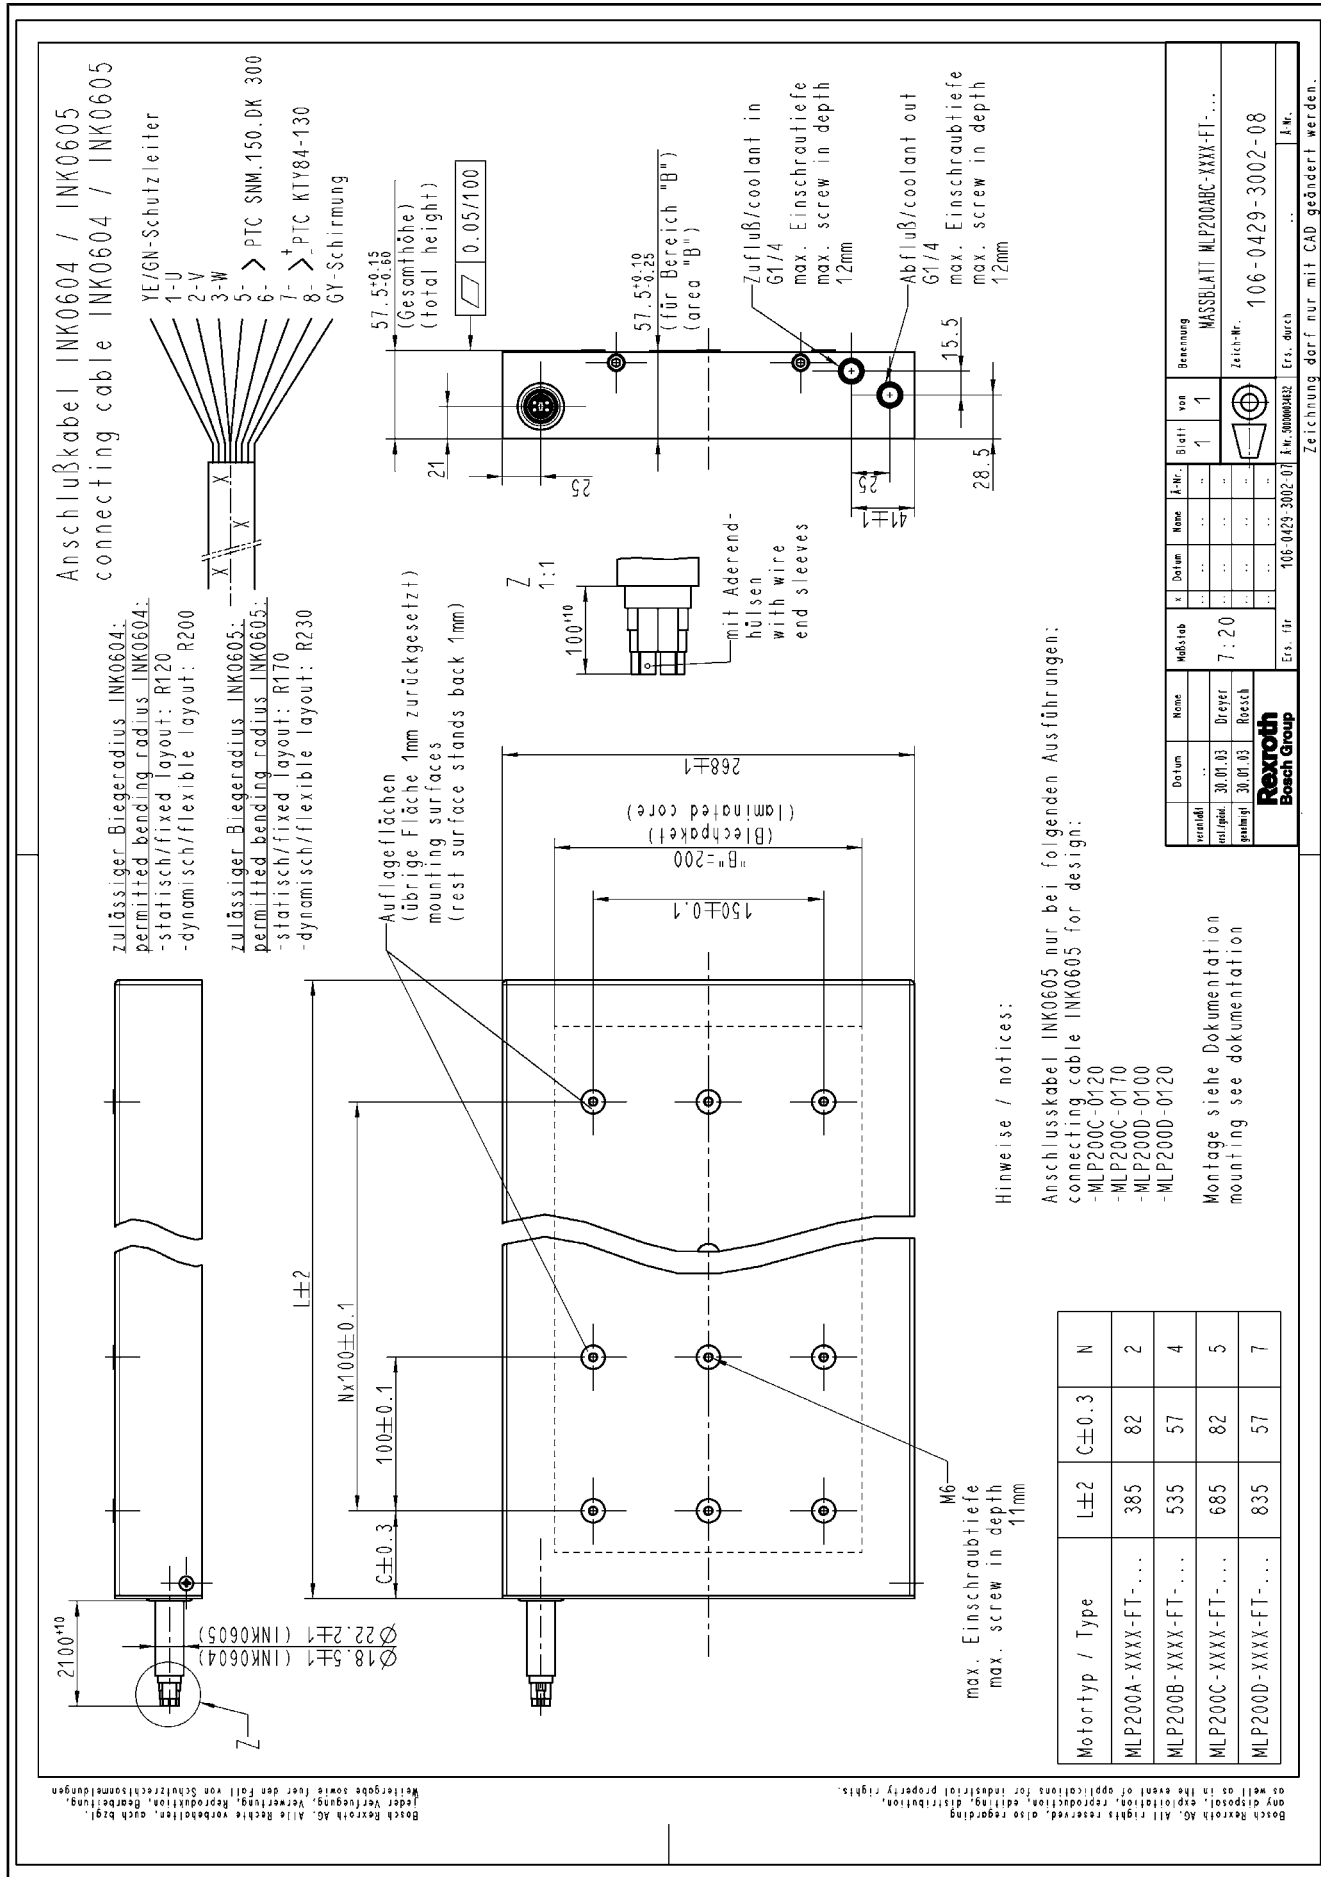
Primary Part MLP200 with Thermo Encapsulation
